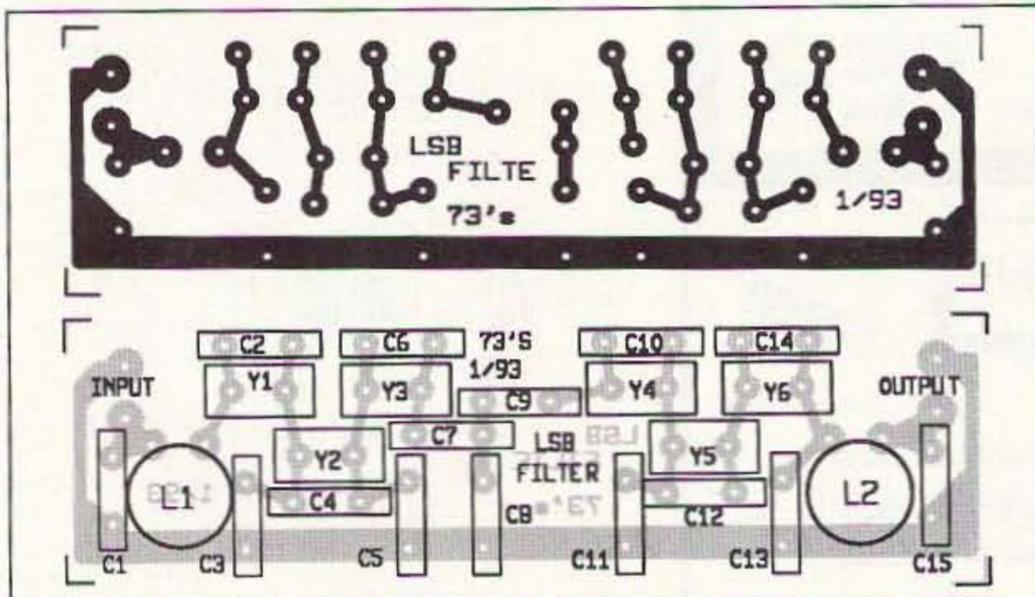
(a). PC board foil pattern for the lower sideband filter. (b). Parts placement diagram.
